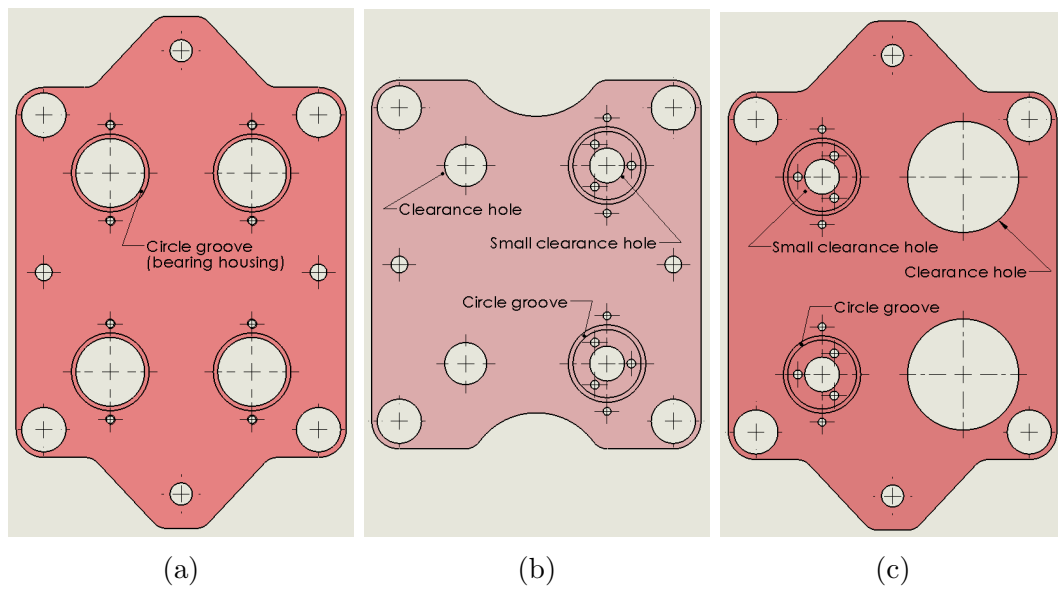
Illustration of three types of aluminum plates in the body part: (a) the aluminum plate A which is assembled to fix the potentiometer at both ends of the body part, (b) the aluminum plate B which is machined to clamp the motor and (c) the aluminum plate C which is mounted in the middle of the body part to clamp the motor.
